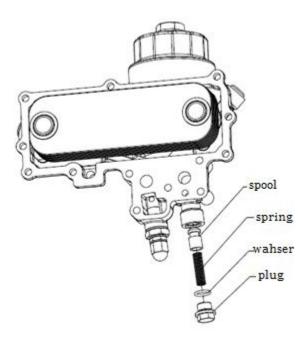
Exploded view of deputy oil pressure limiting valve
